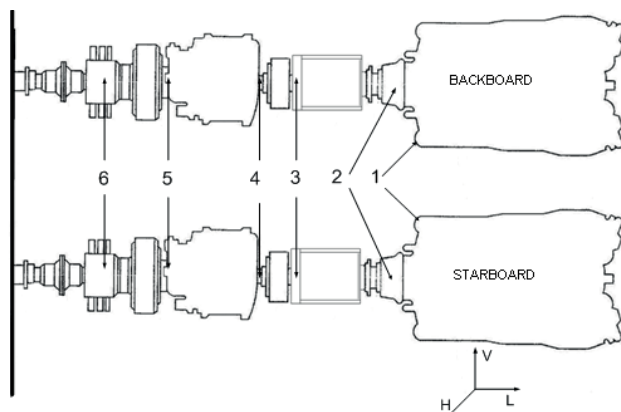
Arrangement of measurement points on the analyzed propulsion systems: 1 – engine bed plate; 2 – power consumer facing engine shaft end; 3 – hydrokinetic coupling; 4 – bearing at input to reversing reduction gear; 5 – bearing at output from the gear; 6 – thrust bearing
